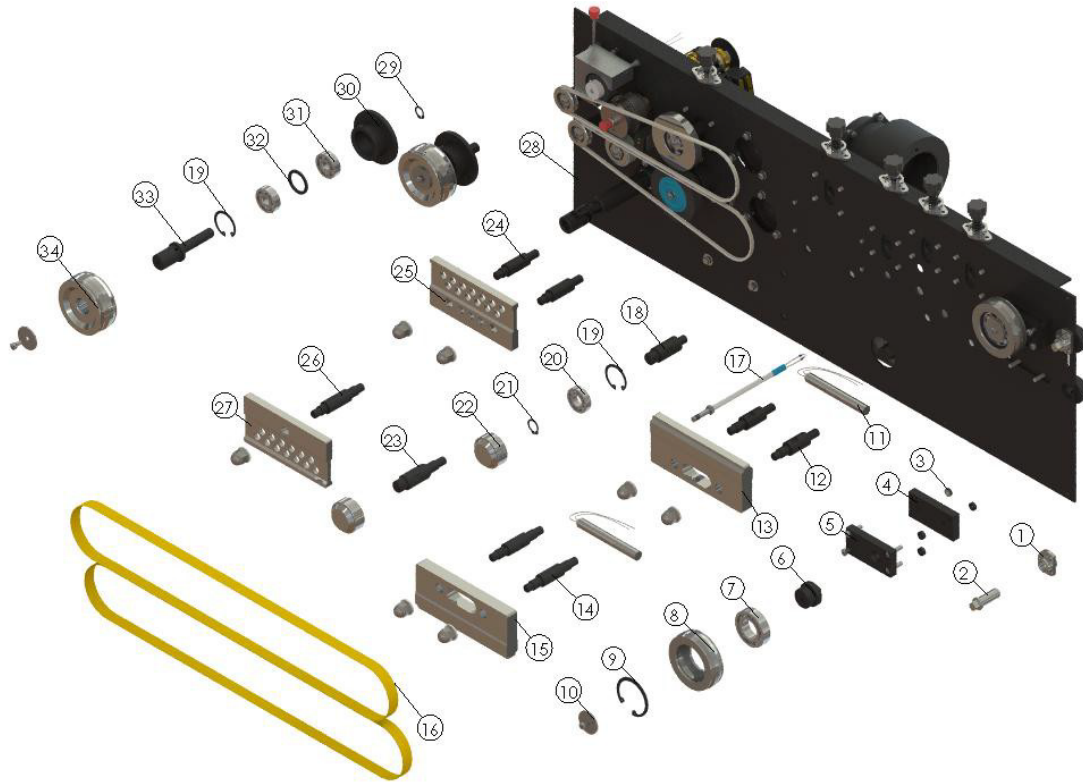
FRM-1120C Heating / Cooling Blocks and Dry Ink Coding
